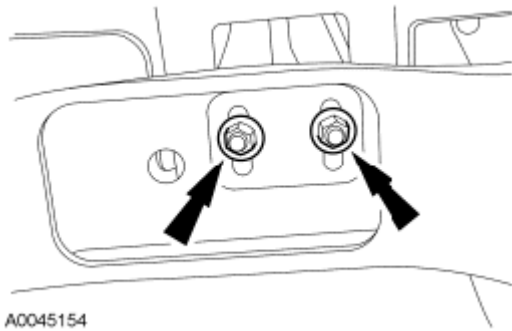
Identifying Transmission Mount-To-Crossmember Nuts
